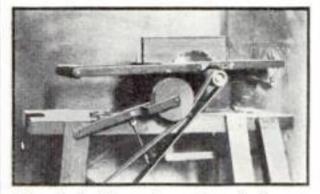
A roller to bear off stock from a saw table which is hinged at the front end
